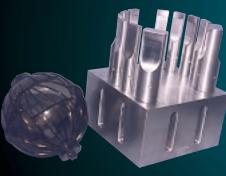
Large composite block horn for welding complex geometries.
